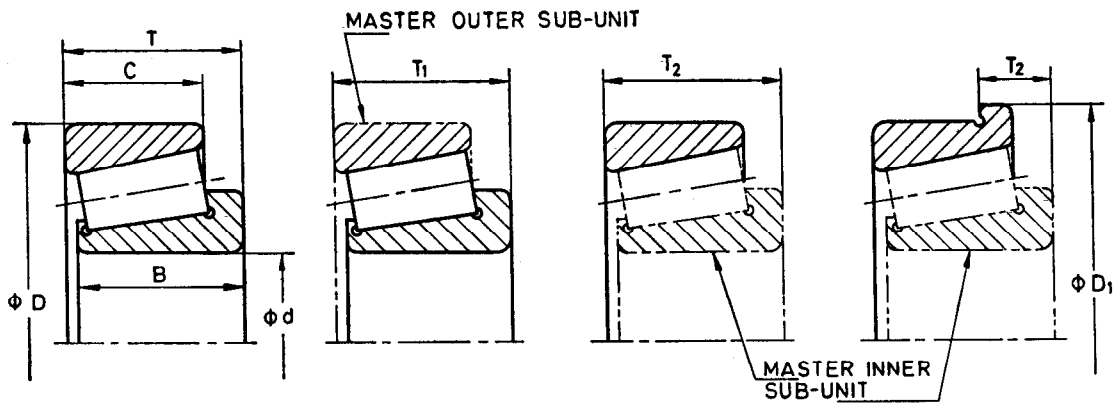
SYMBOLS FOR TAPERED ROLLER BEARINGS[†]
